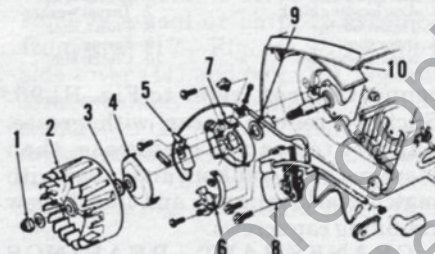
Exploded view of ignition assembly. Felt seal (3) is cemented to breaker box cover (4).
